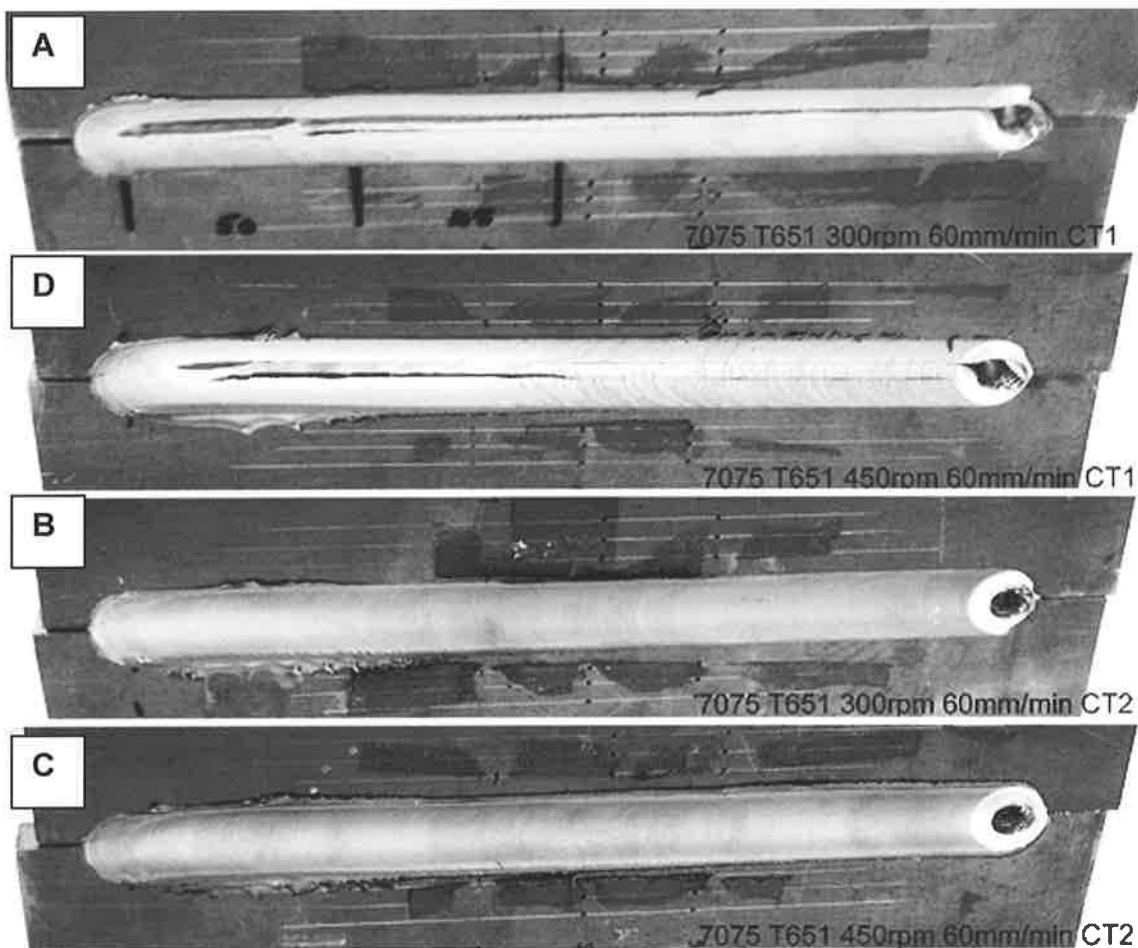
Welds produced in AA7075 T651 from top to bottom 403A, D, B and C. Note welds 403A and D were produced using tool pin CT1-14 and suffer from an open running void.
